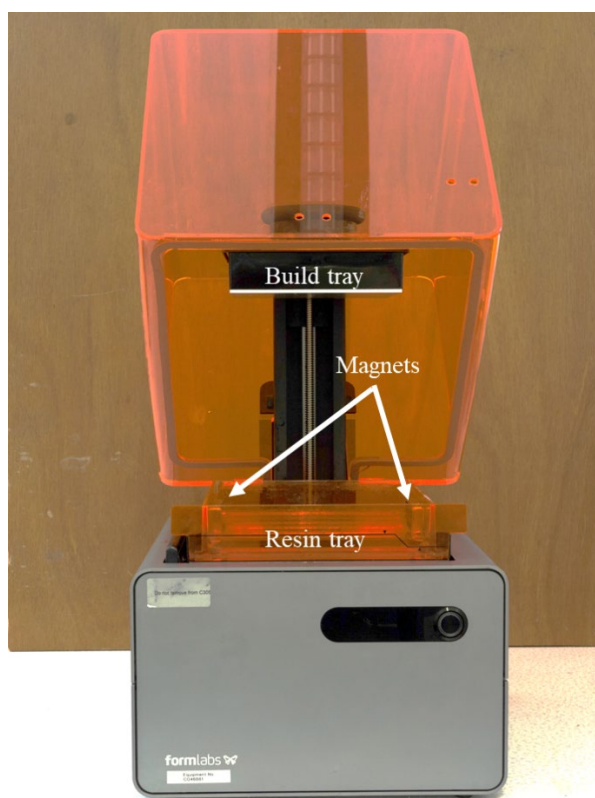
Modified Form 1+ 3D printer with magnets placed in the resin tray.
